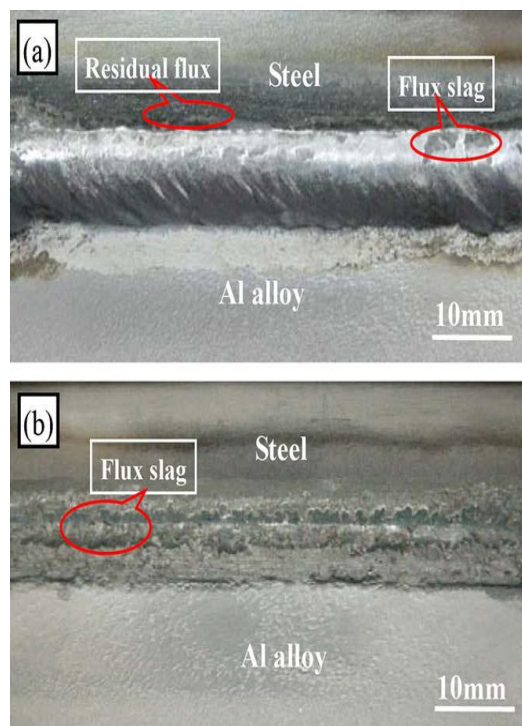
Appearances of the aluminum–steel butt joint: (a) front formation and (b) back formation.
